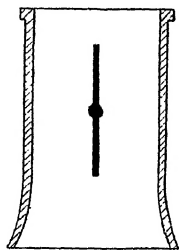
THROTTLE VALVE SHOWN OPEN.
